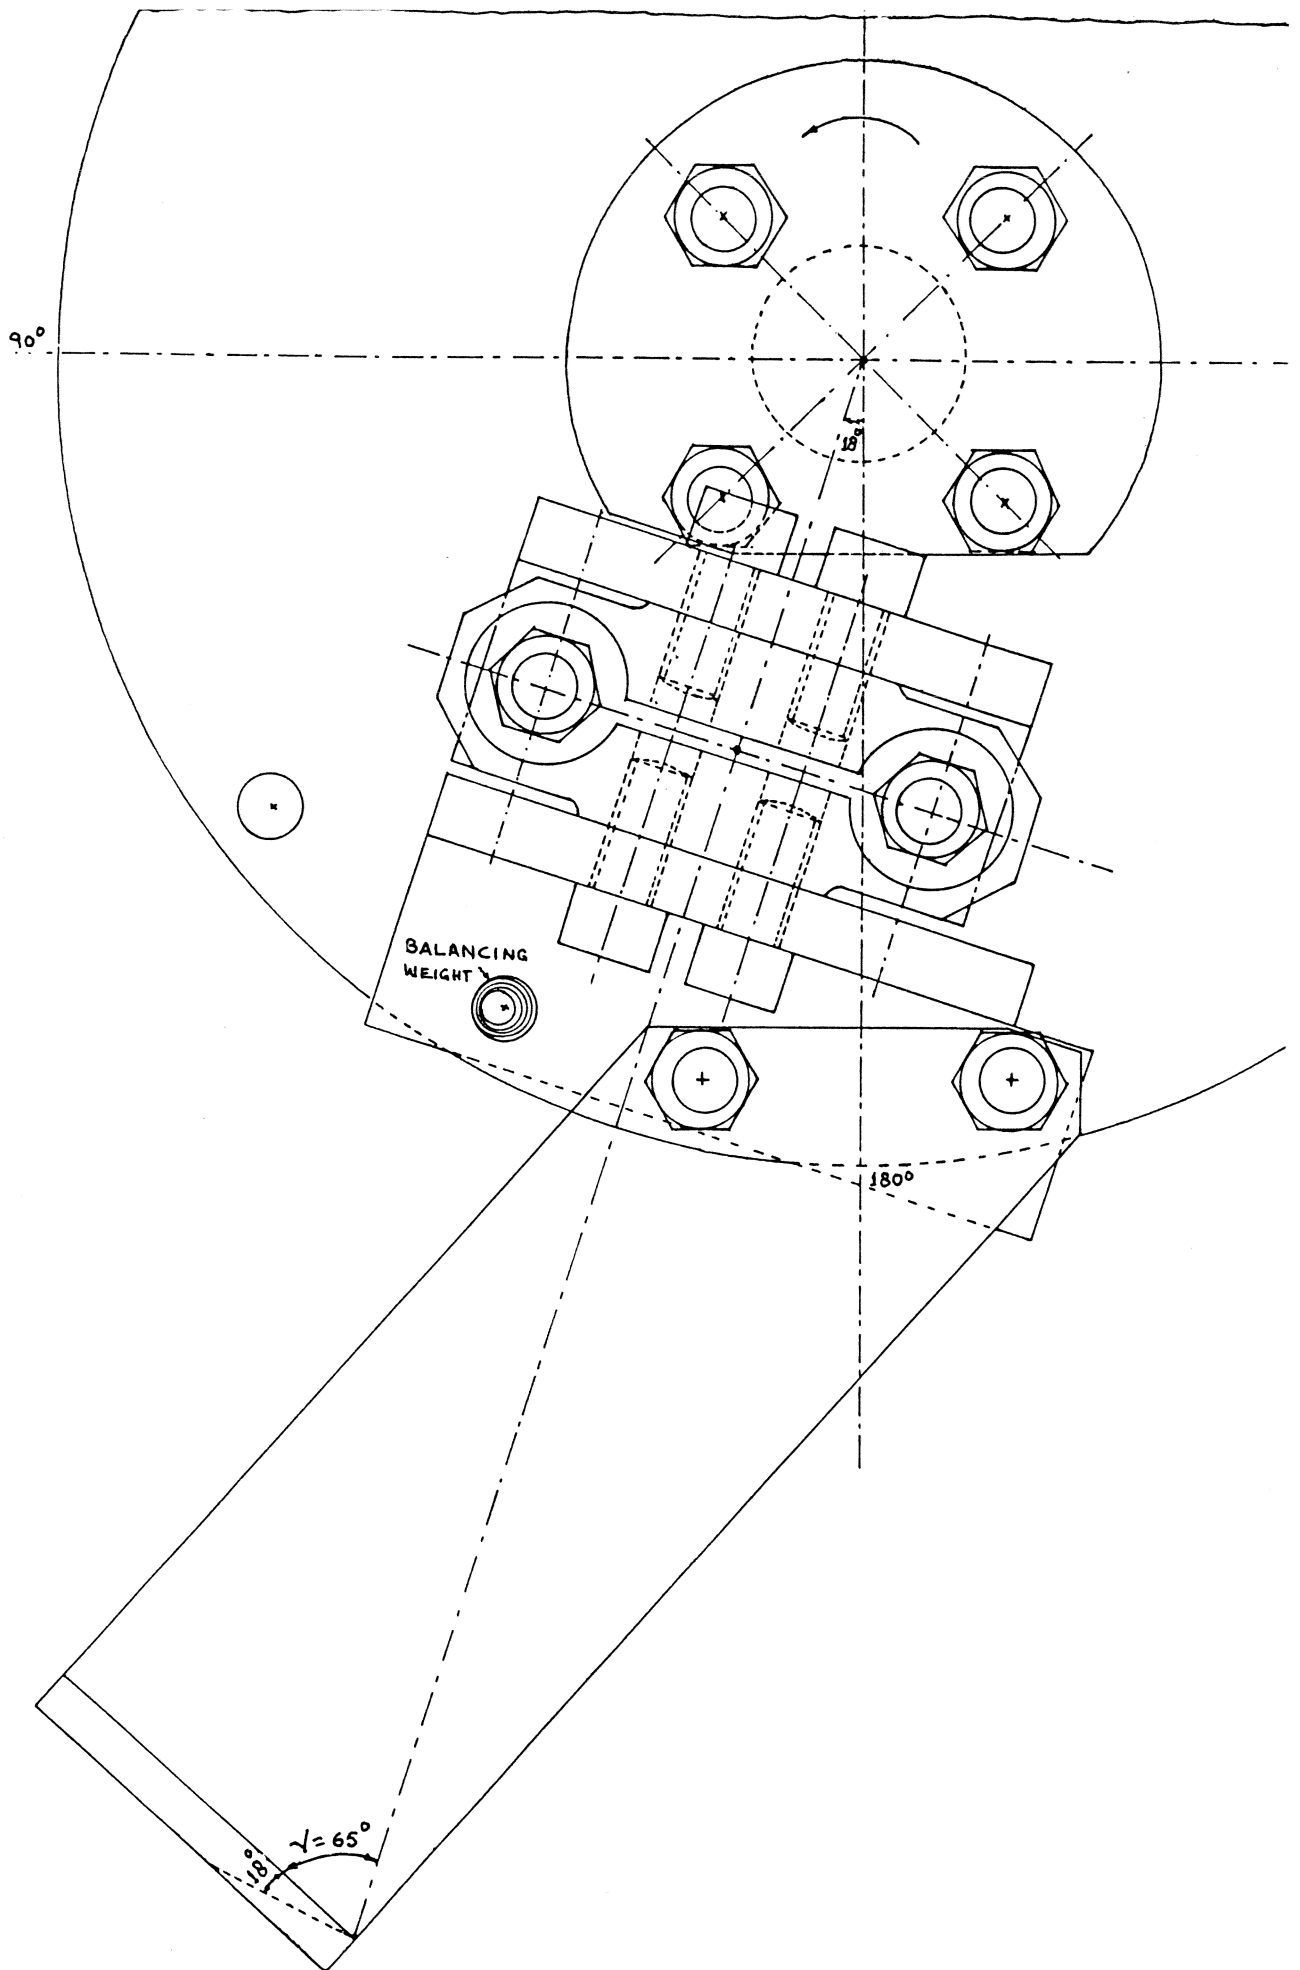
MOUNTING OF THE BLADE AND TRANSDUCER ASSEMBLY ON THE ROTOR DISC
